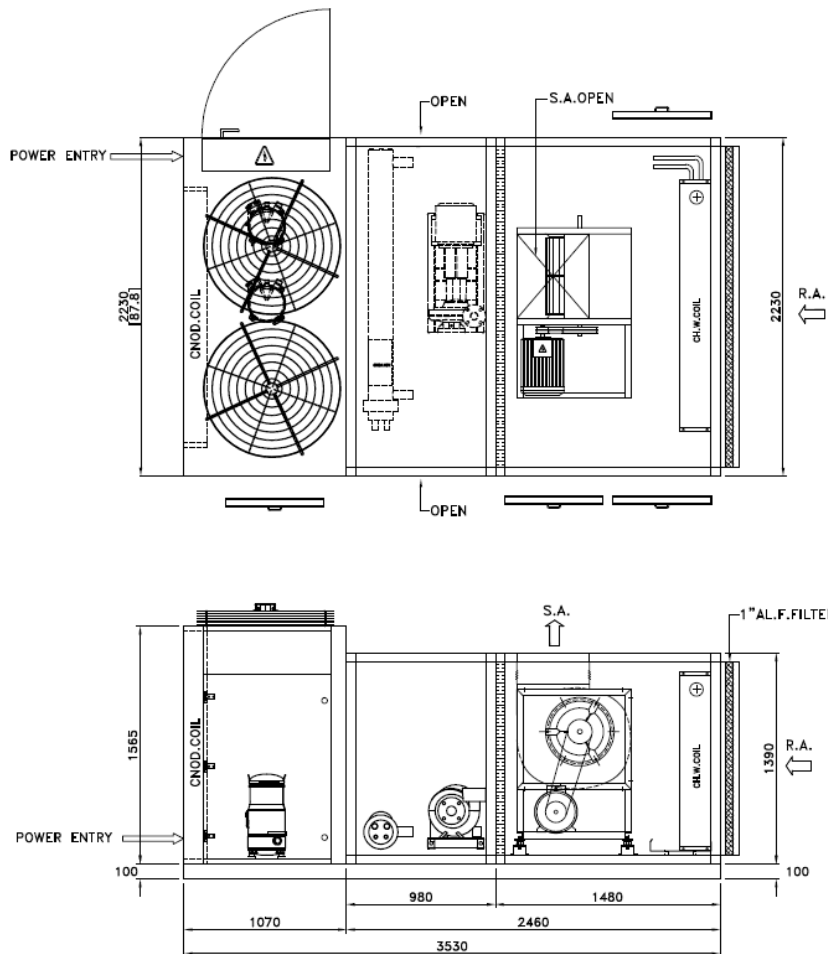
Top and Side Views of 70 kW Prototype Air-Cooled Chiller
